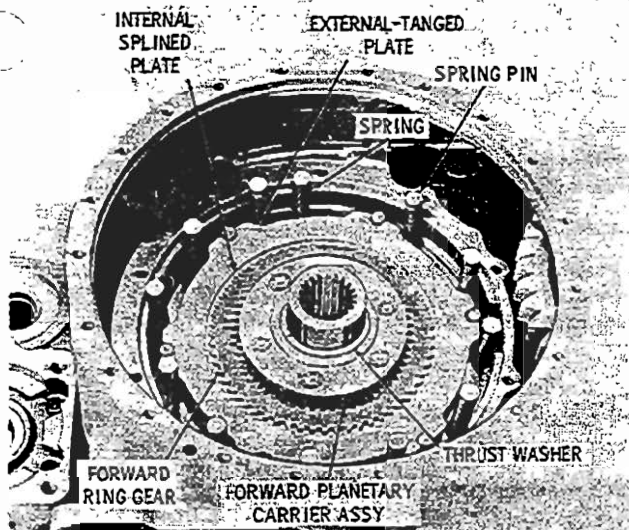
INSTALLING REVERSE CLUTCH PLATES AND PLANETARY CARRIER ASSEMBLY
